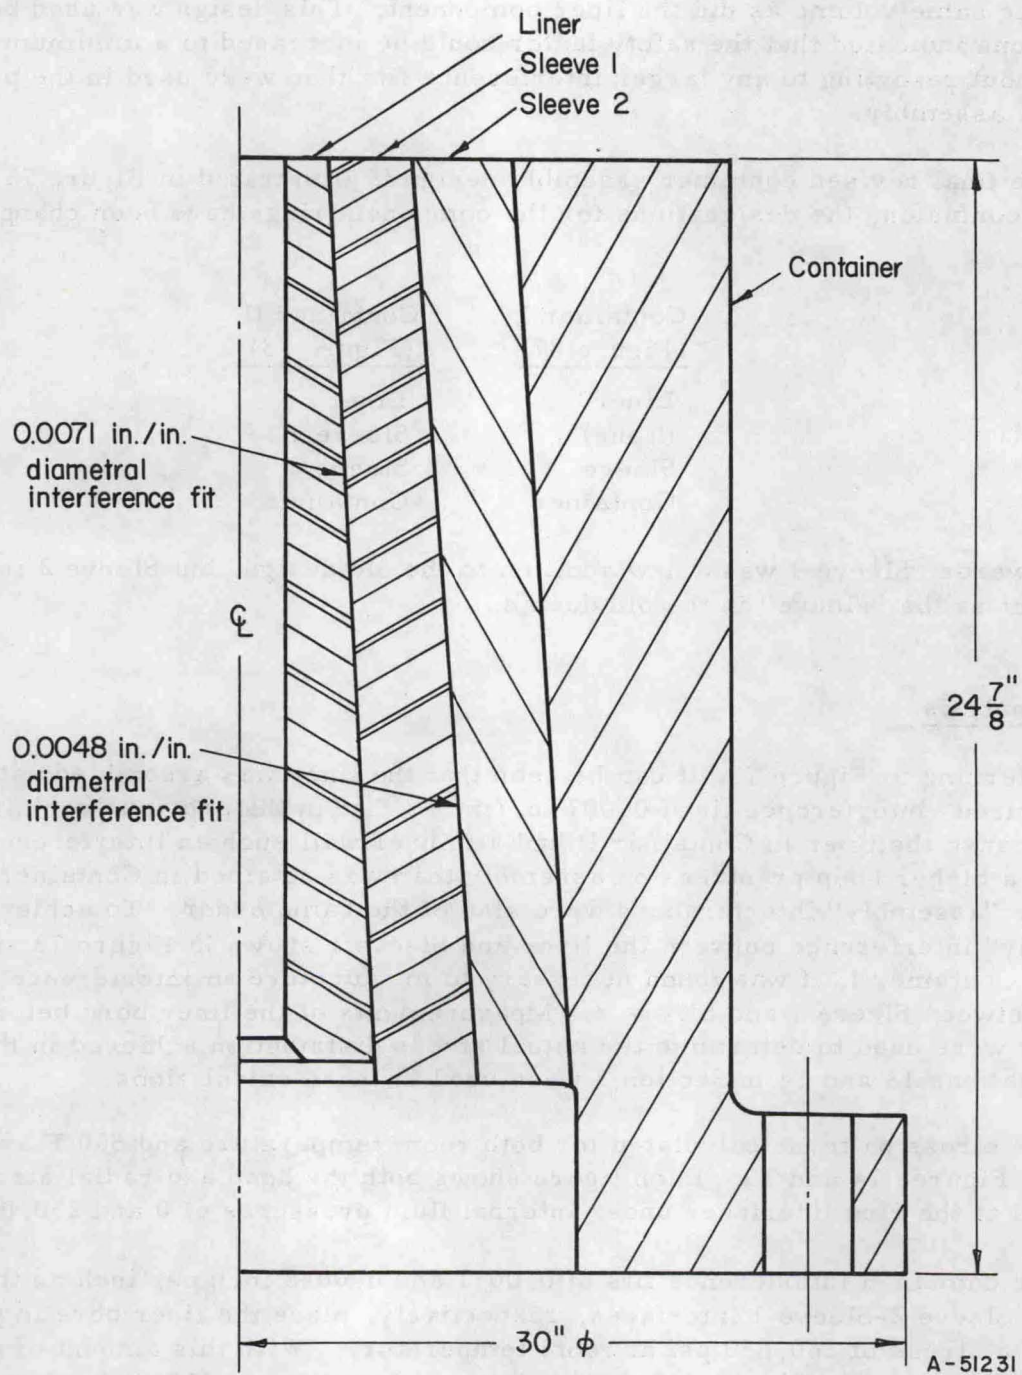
CROSS-SECTIONAL VIEW OF CONTAINER II
